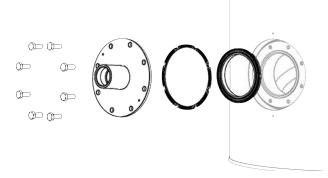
Mounting kit for electric heating module – flanged cover with 1 ½" or 2" sleeve.
